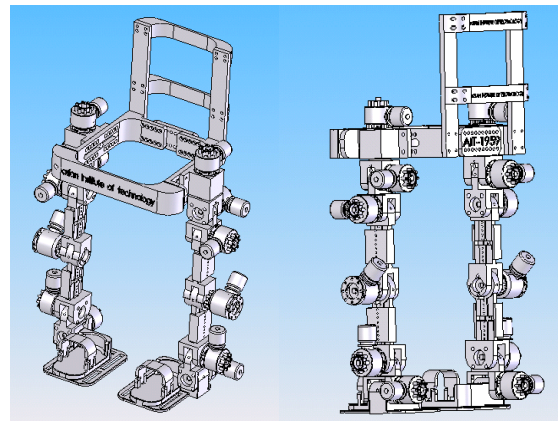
Prototype design of exoskeleton frame (lower part) (a) front view and (b) back view.
